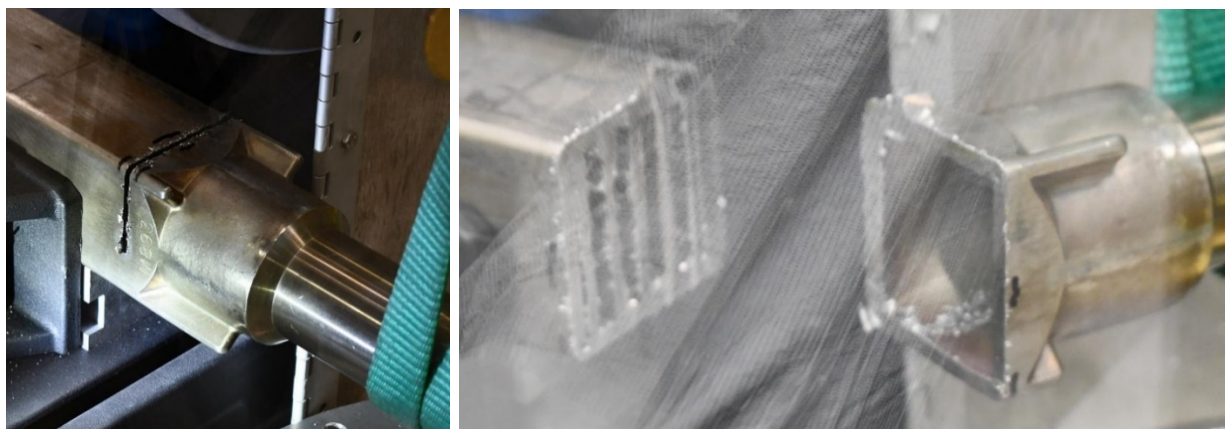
Cutting through bottom grid plate of Fermi-1 radial blanket assembly (left) and separated nozzle end (right).
